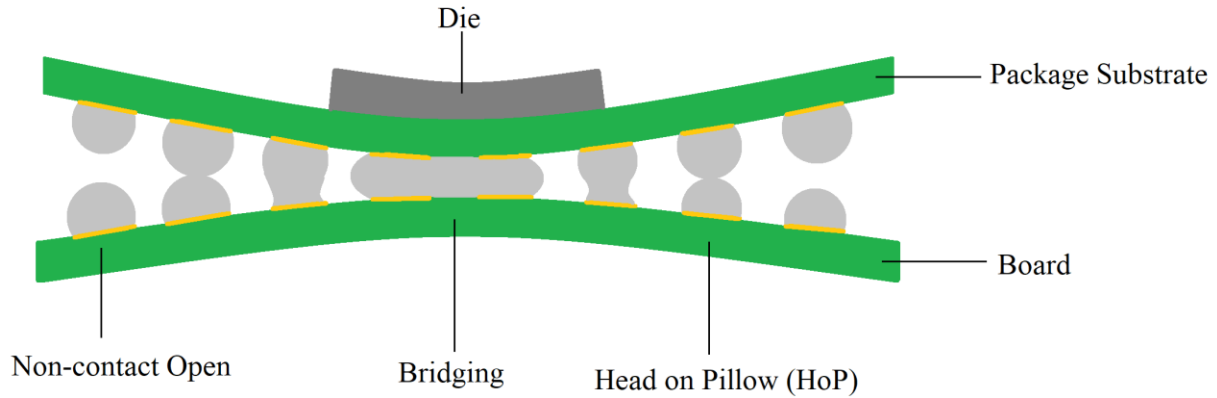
Schematic illustration of component warpage and different defects formed during reflow soldering
